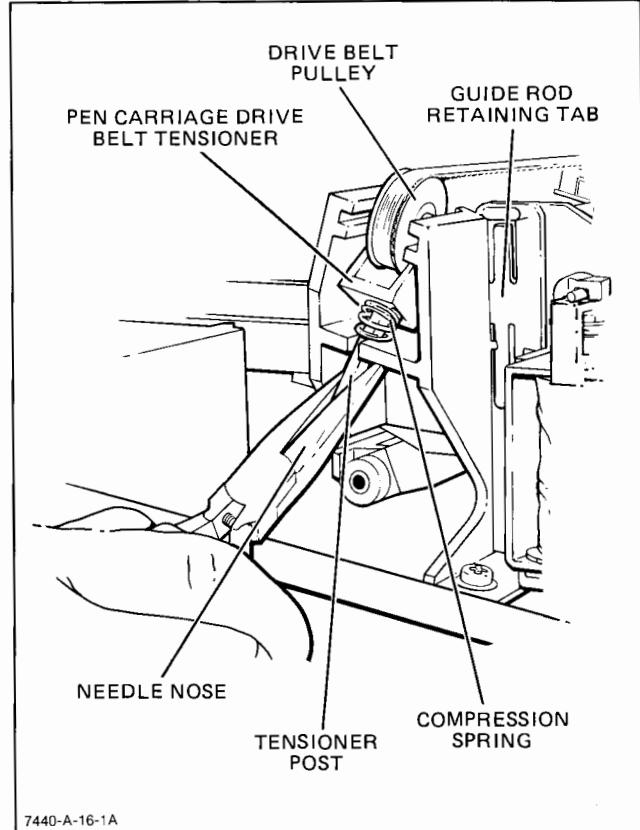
Pen Carriage Assembly Removal, Detail A
